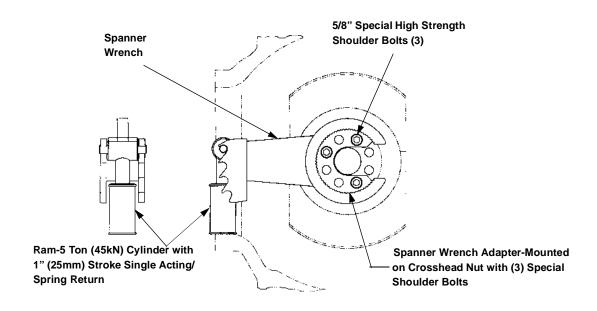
OPTIONAL HYDRAULIC CROSSHEAD-NUT TORQUING TOOL, G-7583
